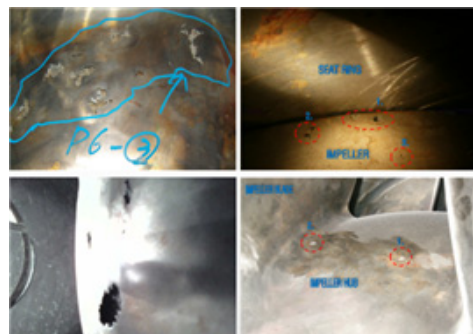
Pitting corrosion on waterjet impeller
